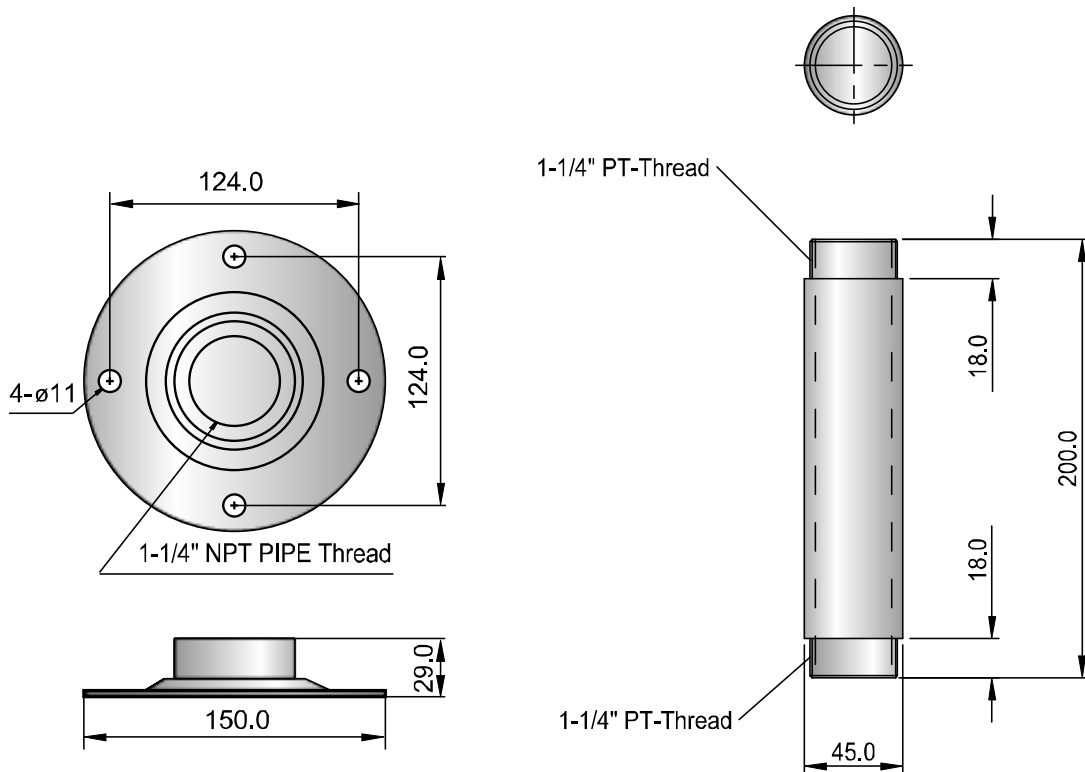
B Ceiling Mount Bracket / Joint Pipe
